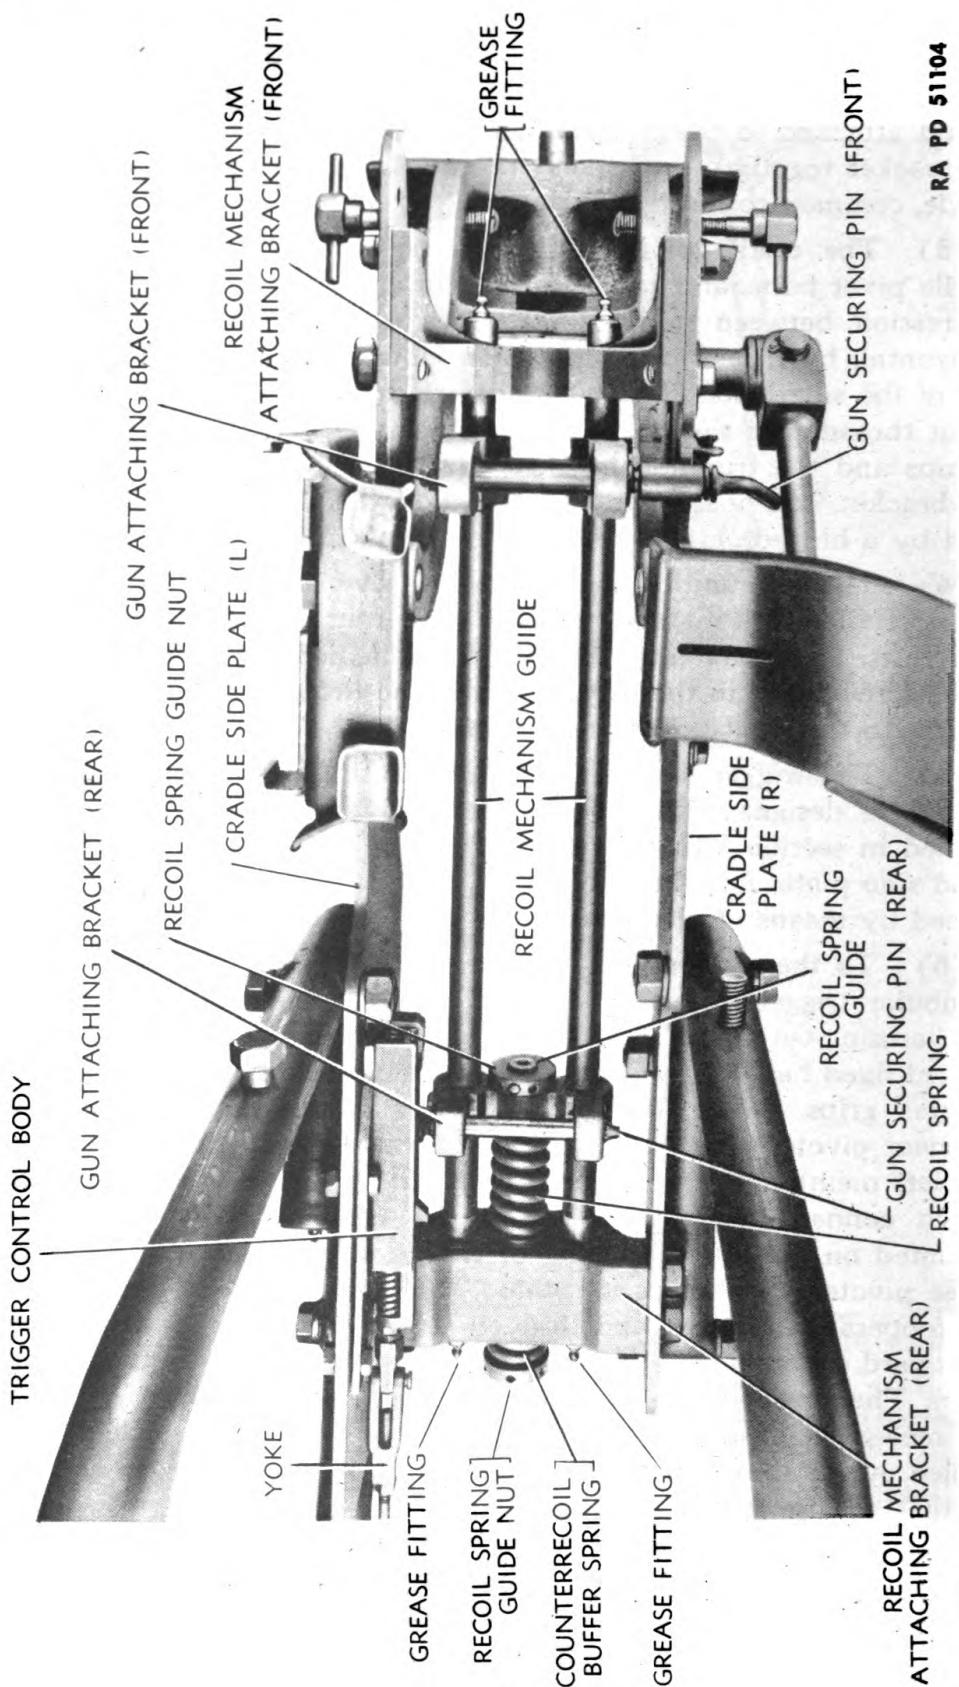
Cradle Group, Showing Recoil Mechanism — Top View — A.A. Machine Gun Mount, Cal. .50, M3
